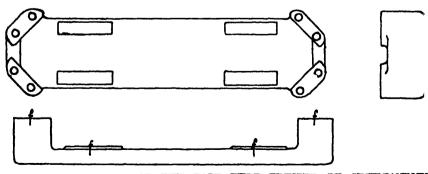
TWO SURFACES OF THIS PART WERE FINISHED BY SIMULTANEOUS DISK GRINDING
